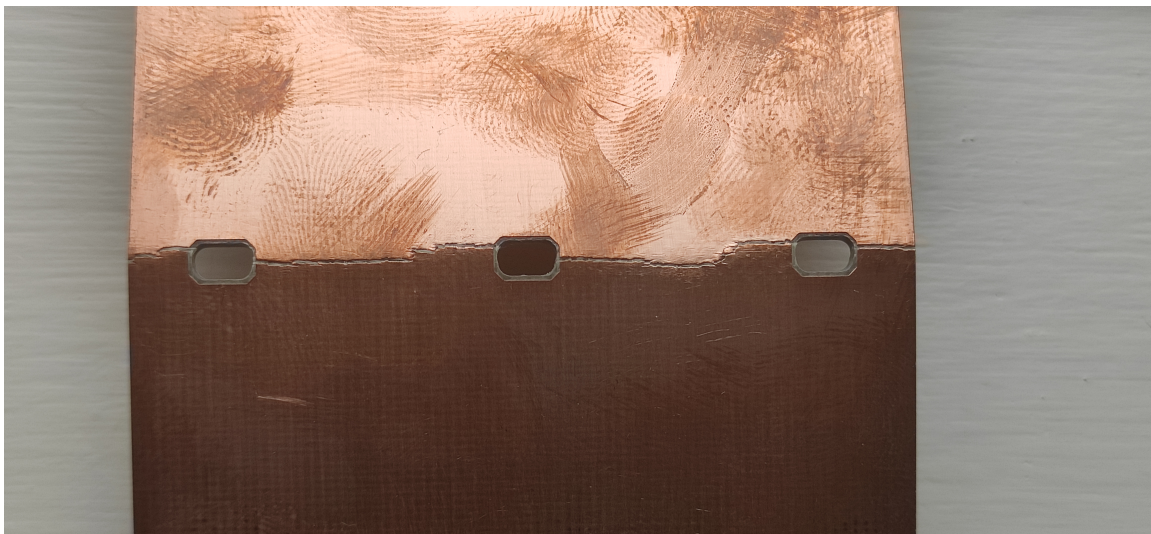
Bottom side of the mechanical test specimen "Eco3" after the three-point-bending test.
